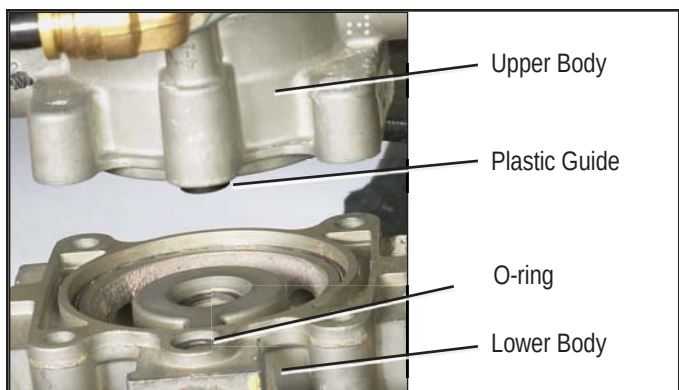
PLASTIC GUIDE AND O-RING SEAL
